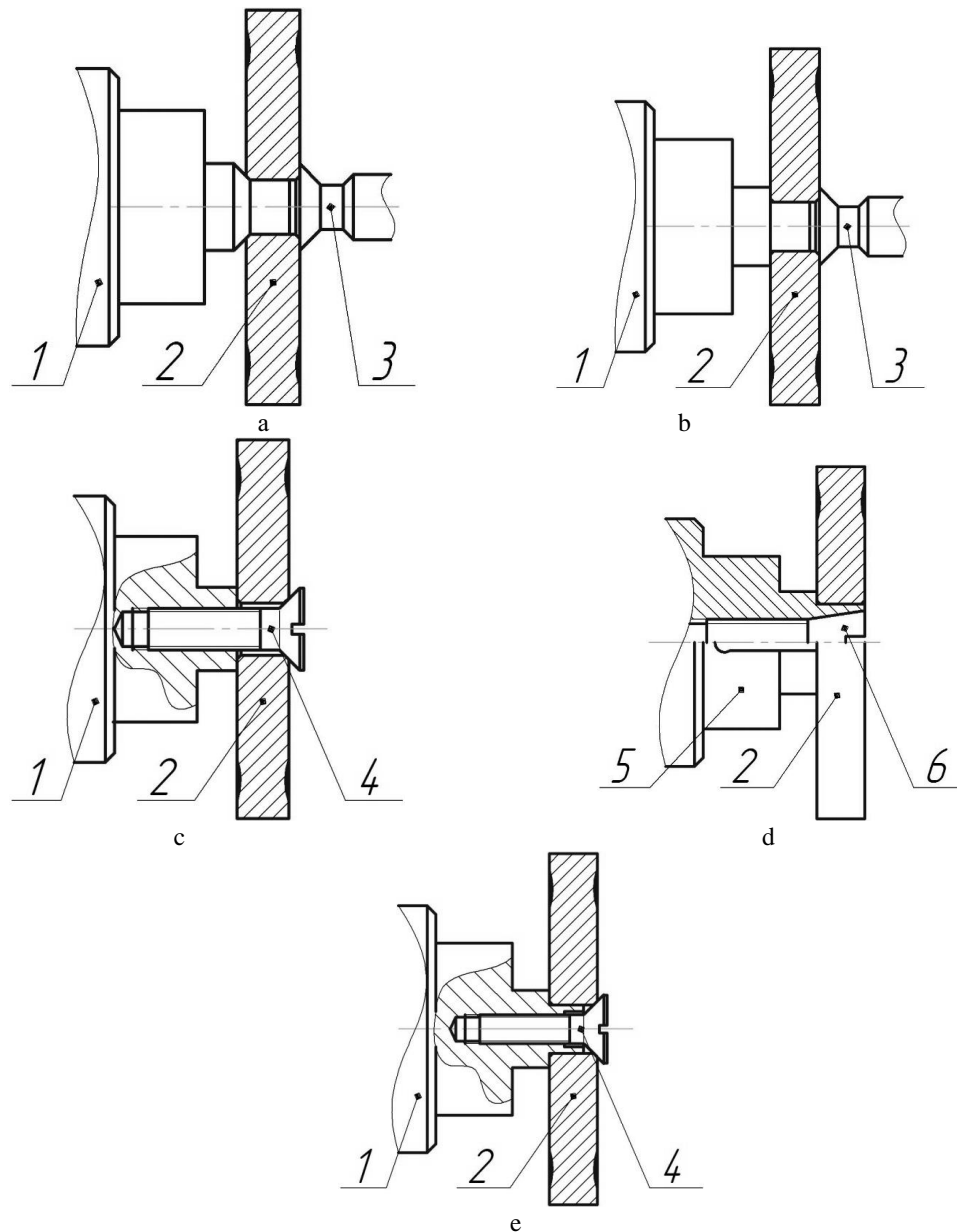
MI mounting schemes: a - clamp mounting with chamfer centering; b - clamp mounting; c - screw mounting; d - collet mounting; e - screw mounting with bush centering.
